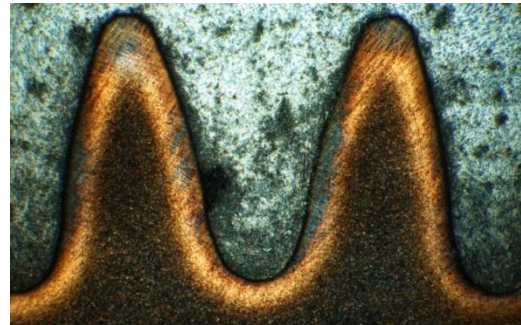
Carburizing layer 0.6 mm of the gear wheel, 10 x enlarged
